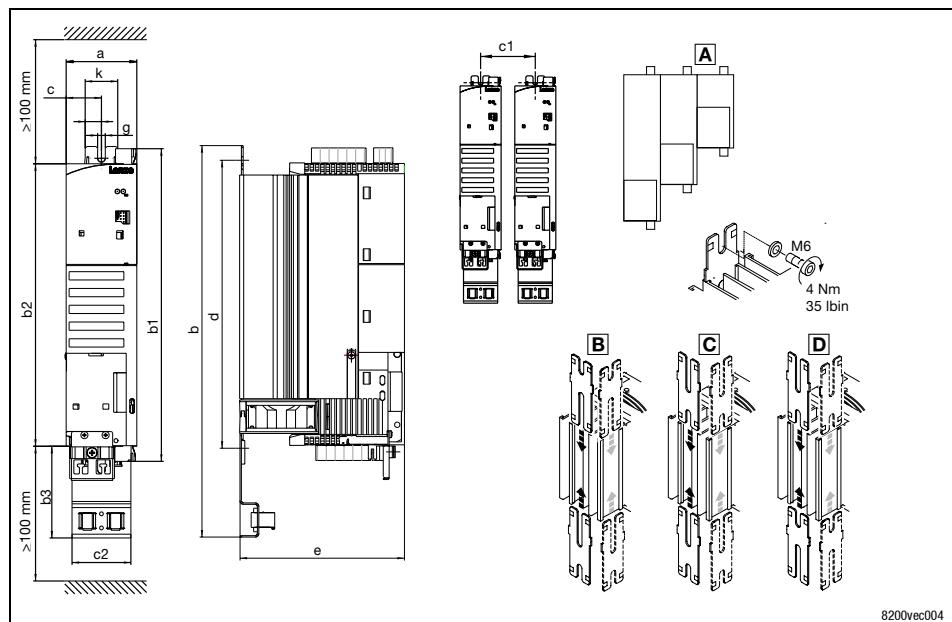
Standard mounting with fixing rails 0.25 ... 2.2 kW
